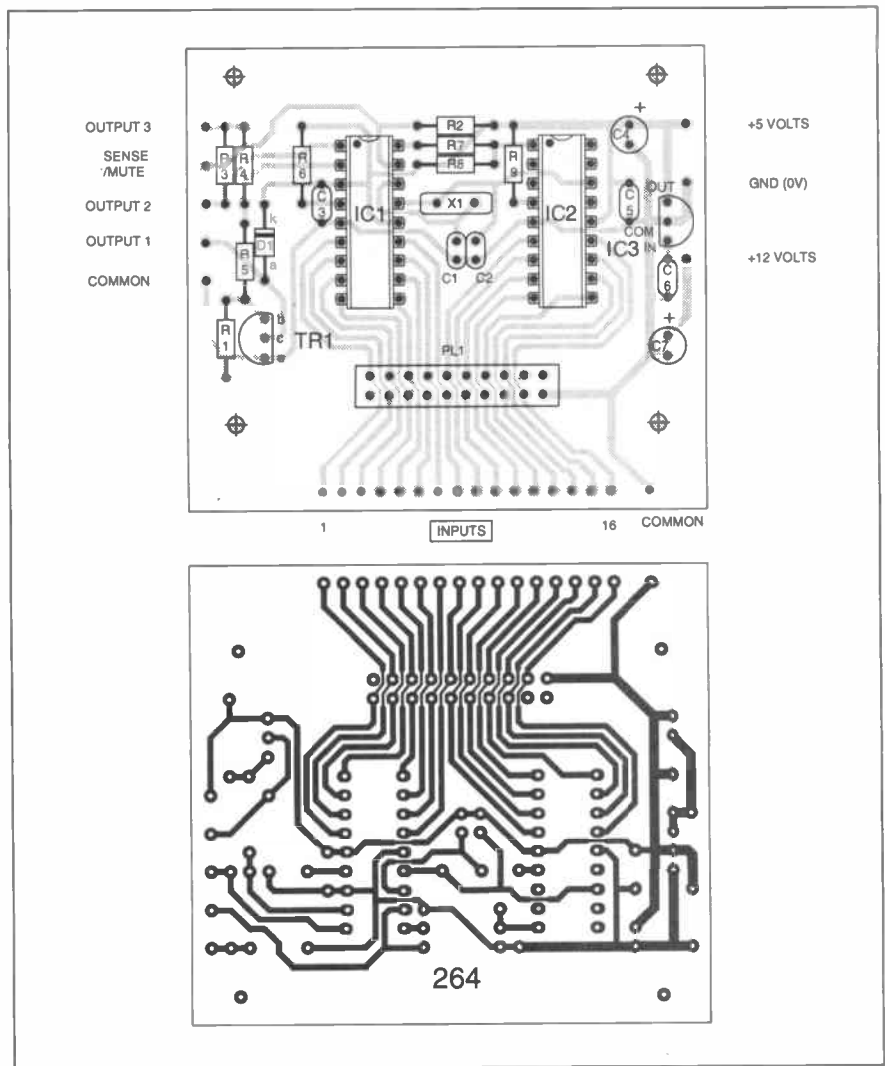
Printed circuit board topside component layout and full size undersided copper foil master pattern for the Transmitter.
